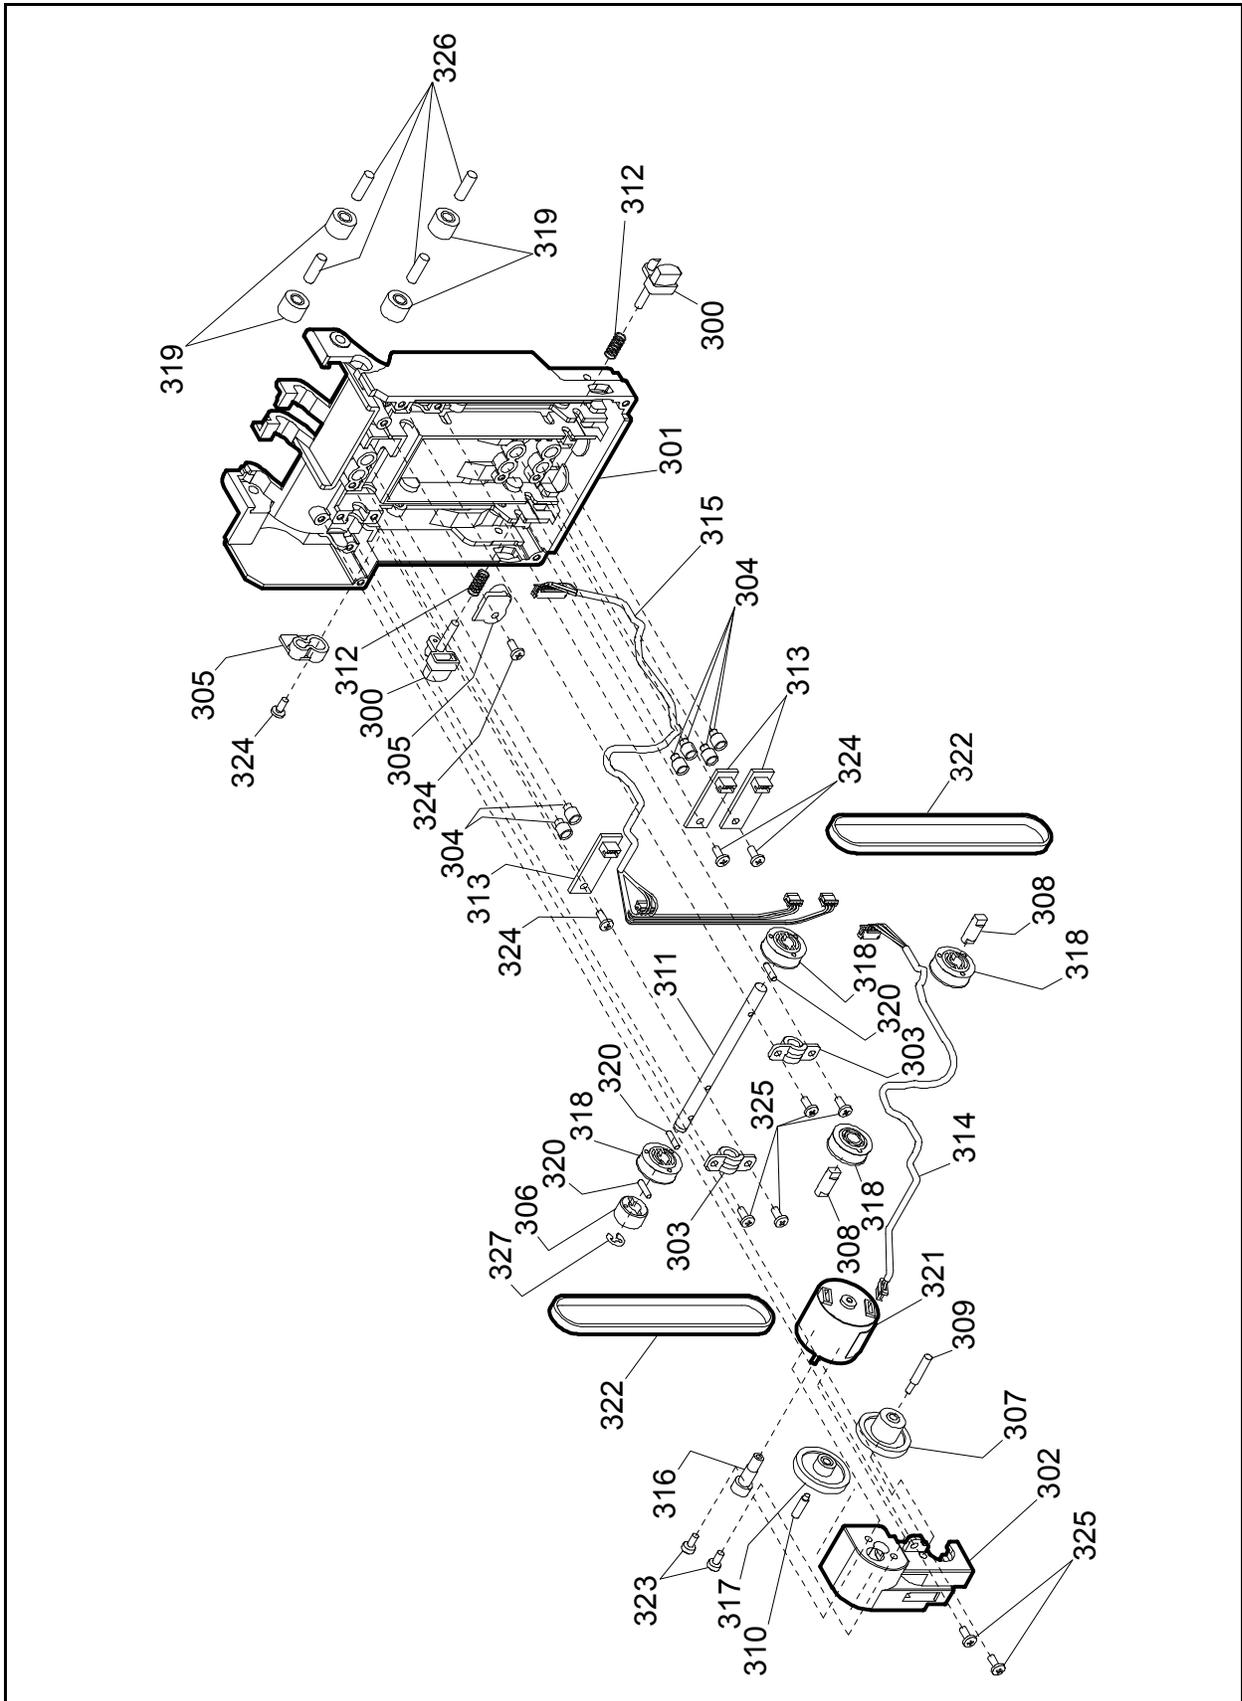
VEGA-RC Twin Rear Unit Exploded View
